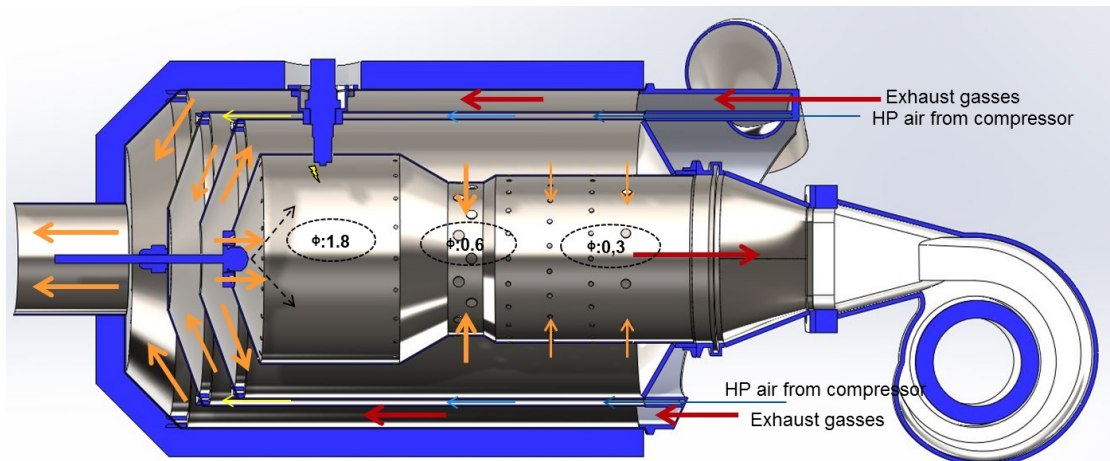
Section view of the combustion chamber with incorporated recuperator
